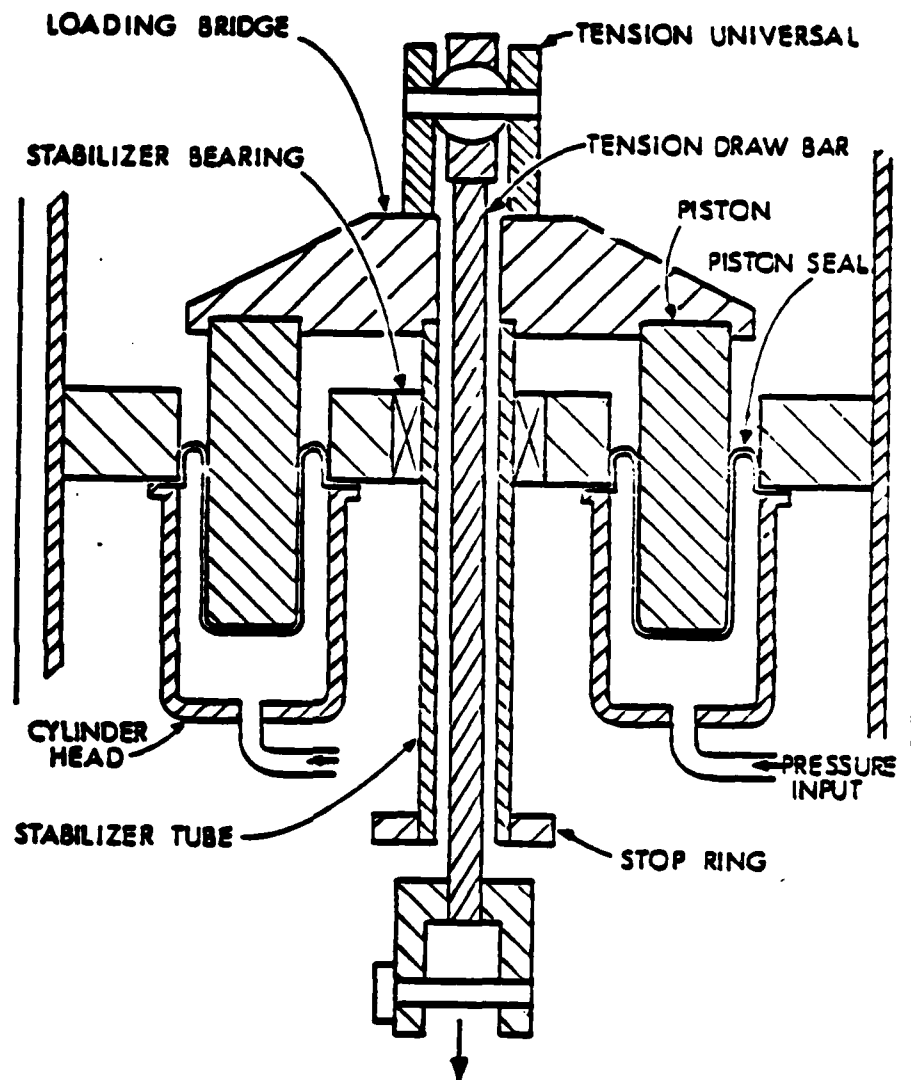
Cross-sectional schematic of actuator crosshead in pneumatic tensile machine.
